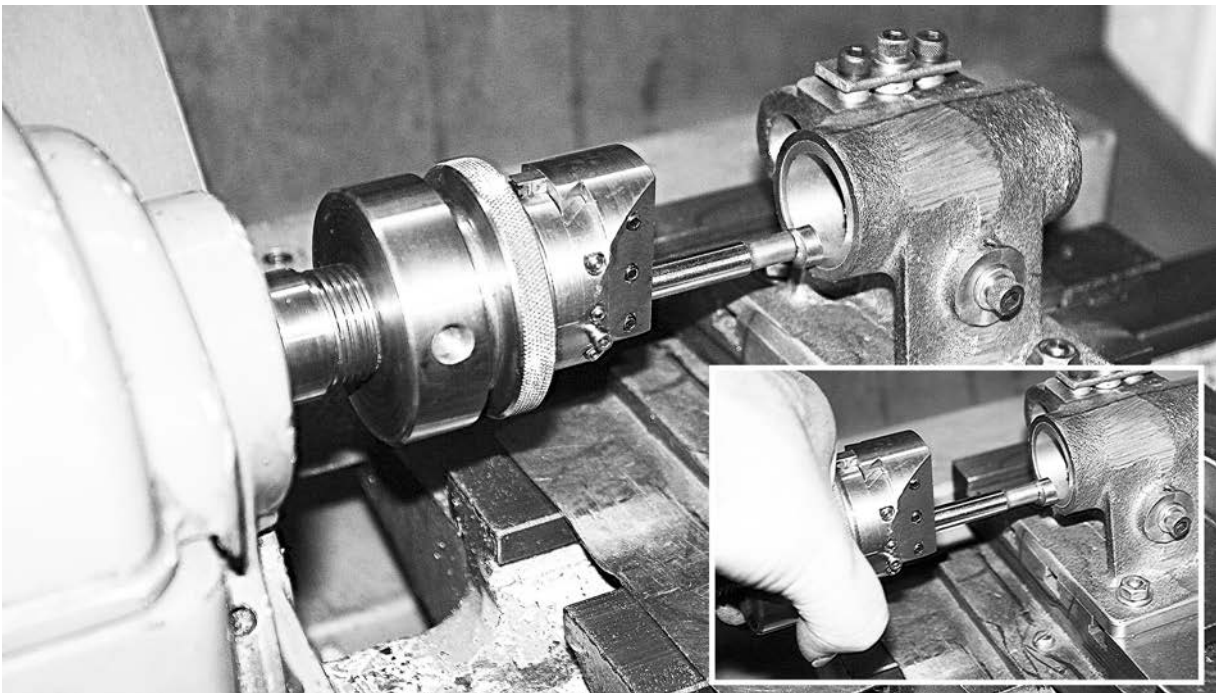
Using the automatic radial feed ring to face the end of a casting. Finishing the face with the casting at the same cross-slide setting ensures it is truly at right-angles to the bore. Radial feed also permits the faced end to be recessed, which cannot be achieved with a flycutter
